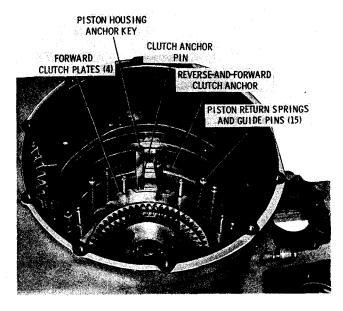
Reverse-and-forward clutch anchor, piston return components, and forward clutch plates
